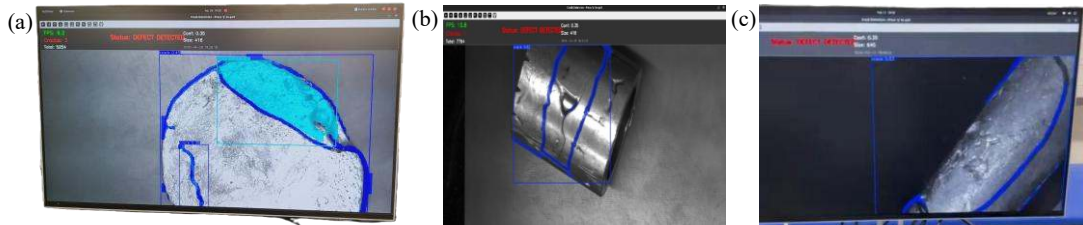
Detected casting defects (a) crack, (b) cold shut, and (c) shrinkage.
